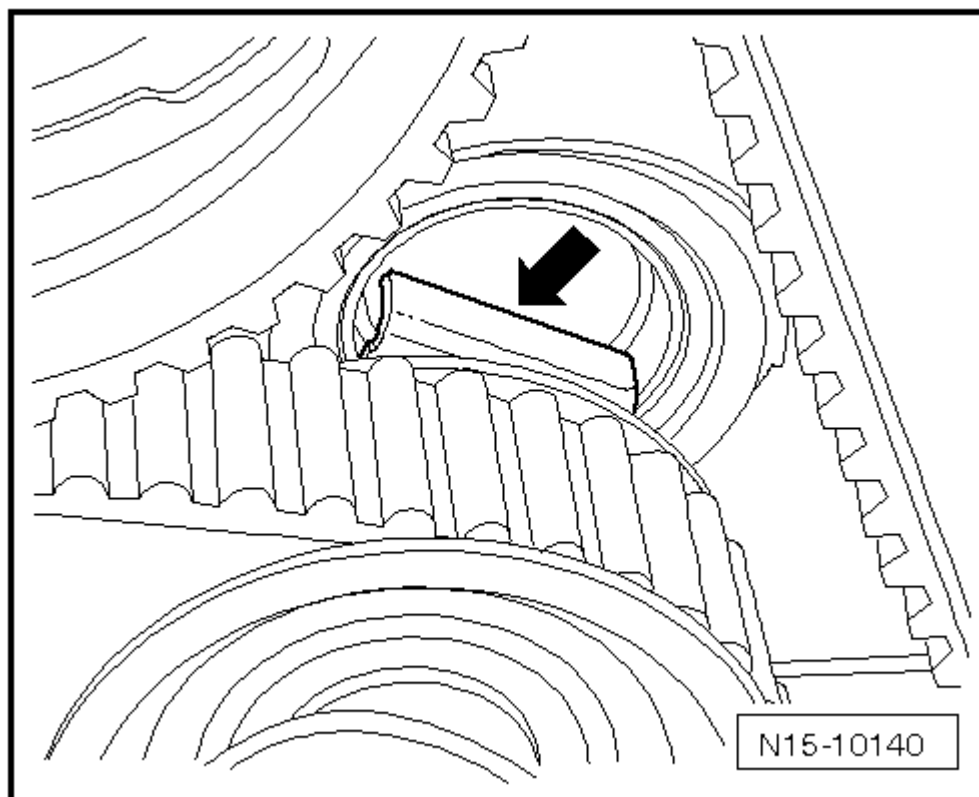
Identifying Tensioning Roller Is Properly Seated In Cylinder Head
